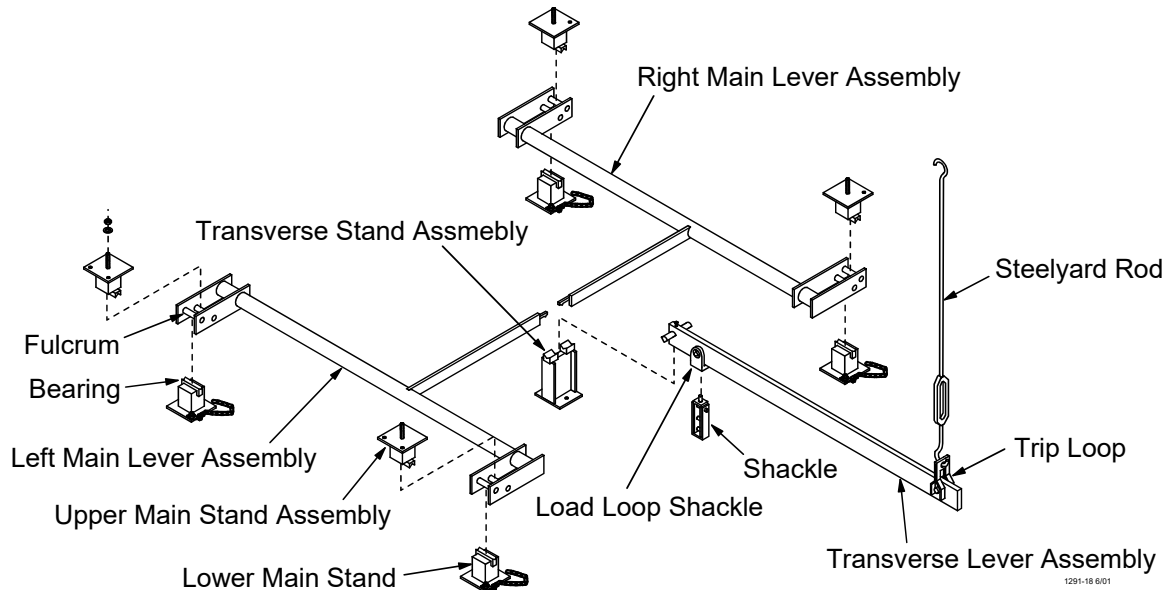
Installing the Stand Assemblies and Lever Assemblies
